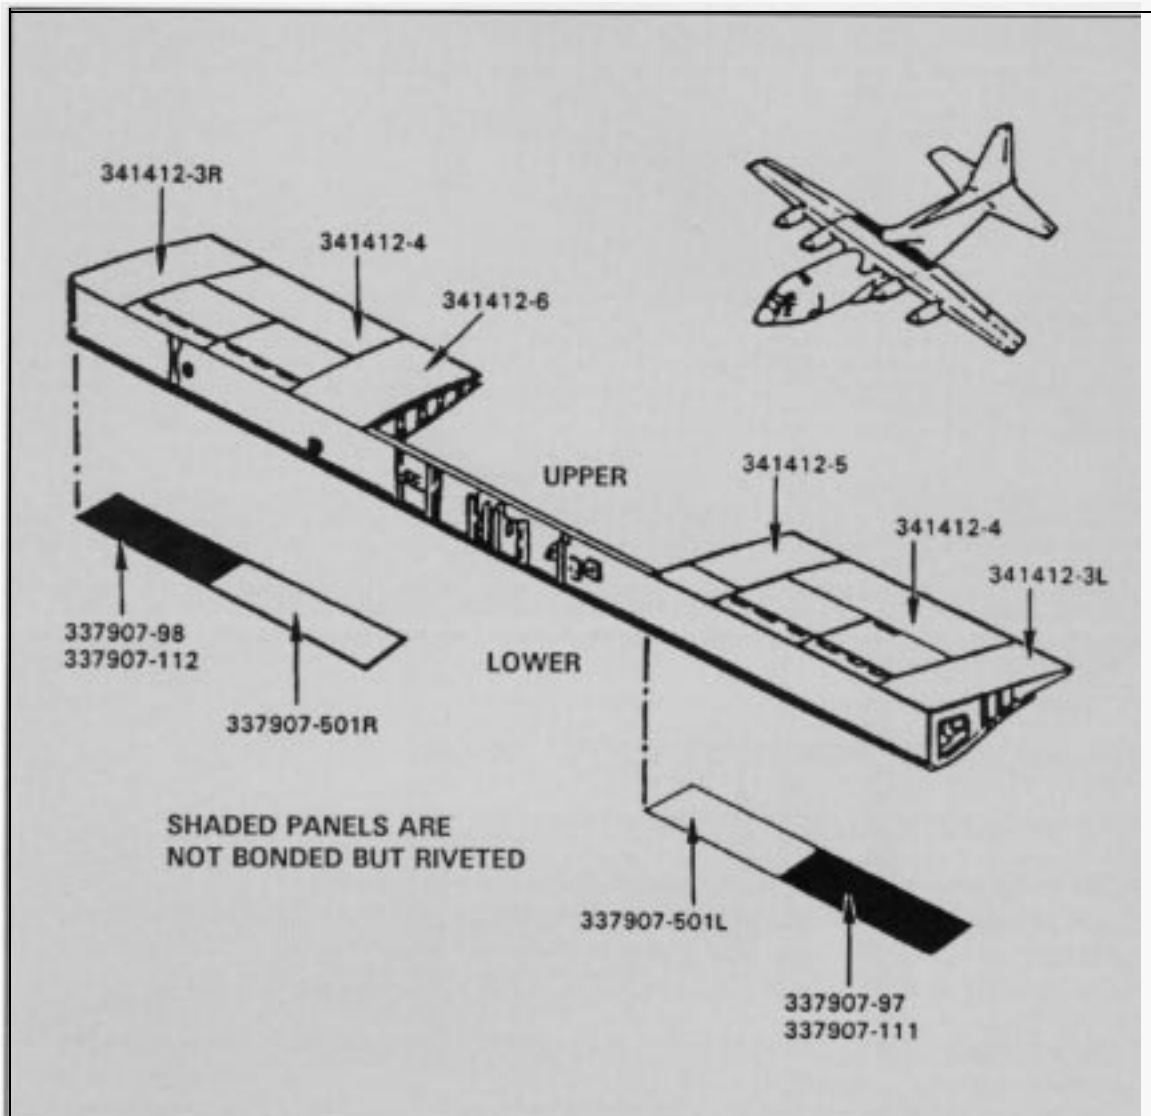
Riveted wing panels made of 2014-T3 aluminum alloy used at specific locations along the center wing trailing edge resist corrosion, disbandment.
